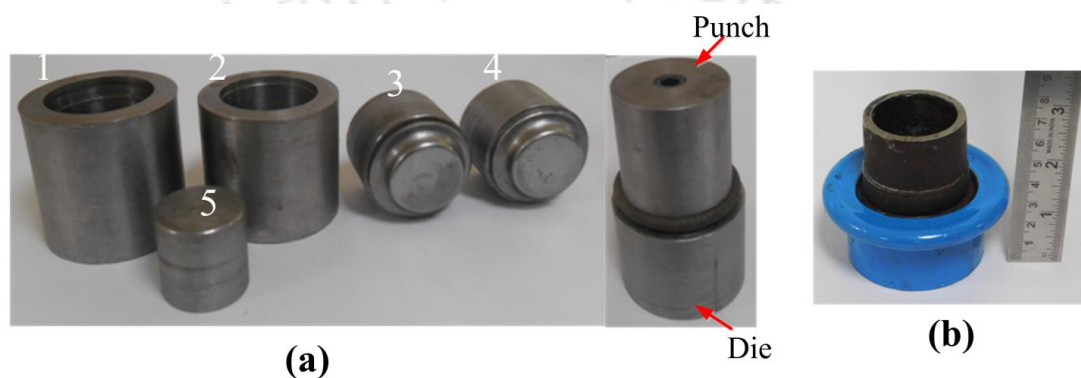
End to end joining of tubes, (a) Disassembled and assembled view of active tools used in tube to tube joining process, (1: Punch with projected height 10.2 mm, 2: Punch with projected height 4.2 mm, 3: Die with offset distance for outer tube 2 mm, 4: Die with offset distance for outer tube 3 mm, 5: Cylindrical block used to support the inner tube inside punch), (b) Final tube-tube joint product
